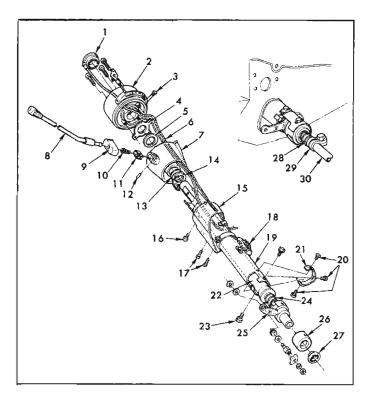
Exploded View of Automatic Transmission Mast Jacket
